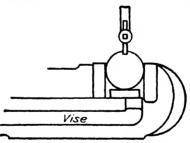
Cutting a keyway in a shaft held in a vise.
